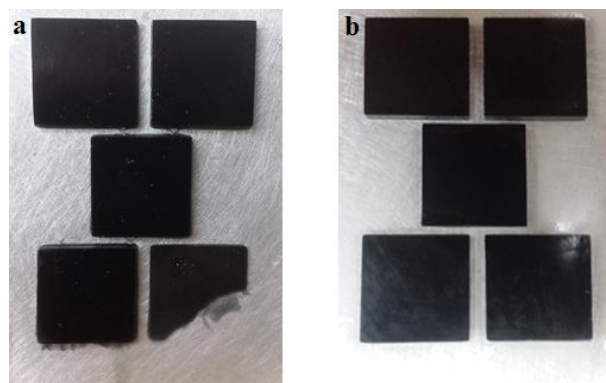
(a) Printing tests without mask; (b) Printing tests with improved mask.
